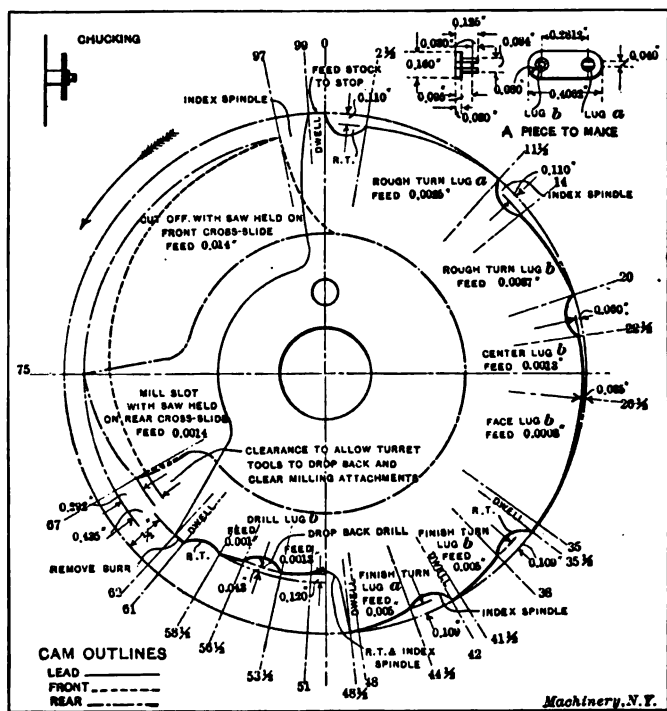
Lay-out of a Set of Cams for Making a Piece requiring the Indexing of the Work-spindle
